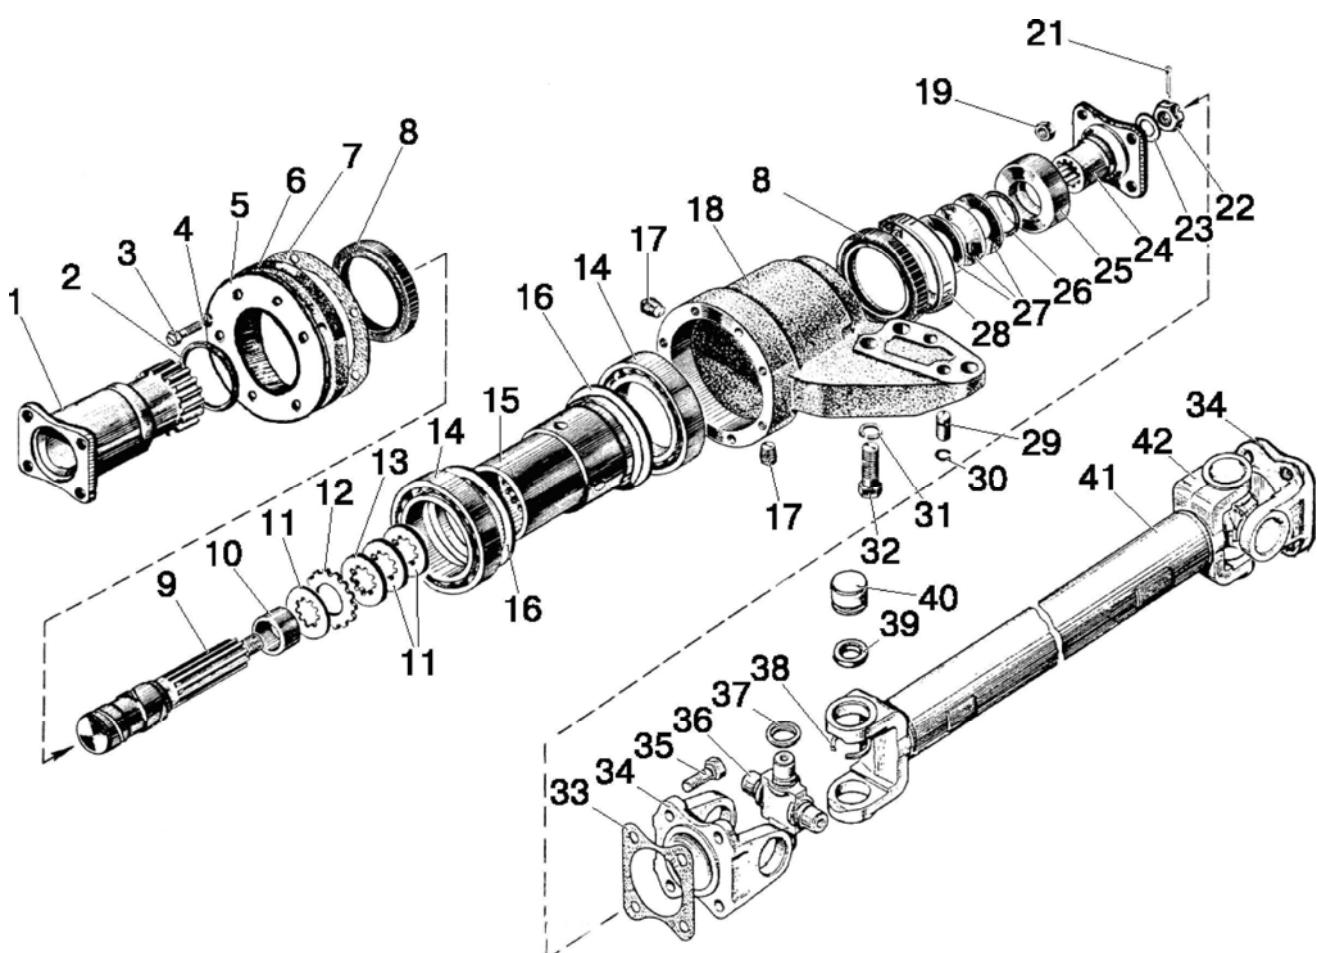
Cardan shaft. Intermediate cardan shaft bearing. (for Belarus-920/920.2/920.3/952/952.2/952.3)
